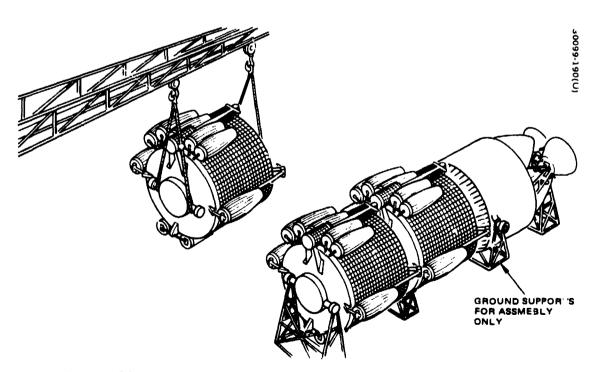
Horizontal Assembly for Loading Into Shittle Bay
